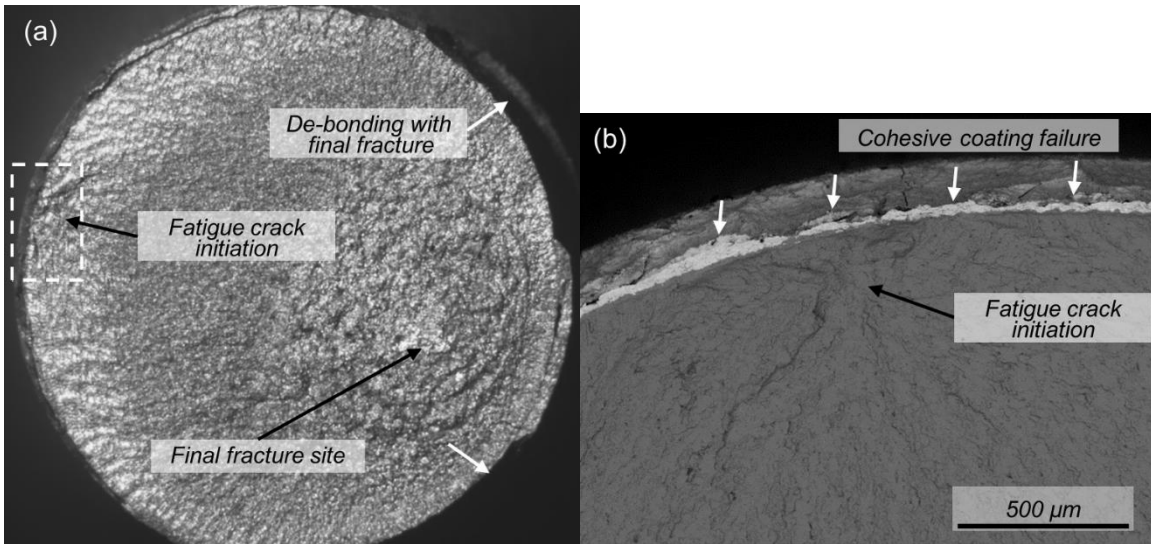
(a) Optical image of typical fatigue fracture surface with fatigue crack initiation, final fracture site, and coating de-bonding from final fracture indicate. SEM of the highlighted region of initiation site shown in (b) with cohesive coating failure and fatigue crack initiation site. Both images are of a single A + HT sample
